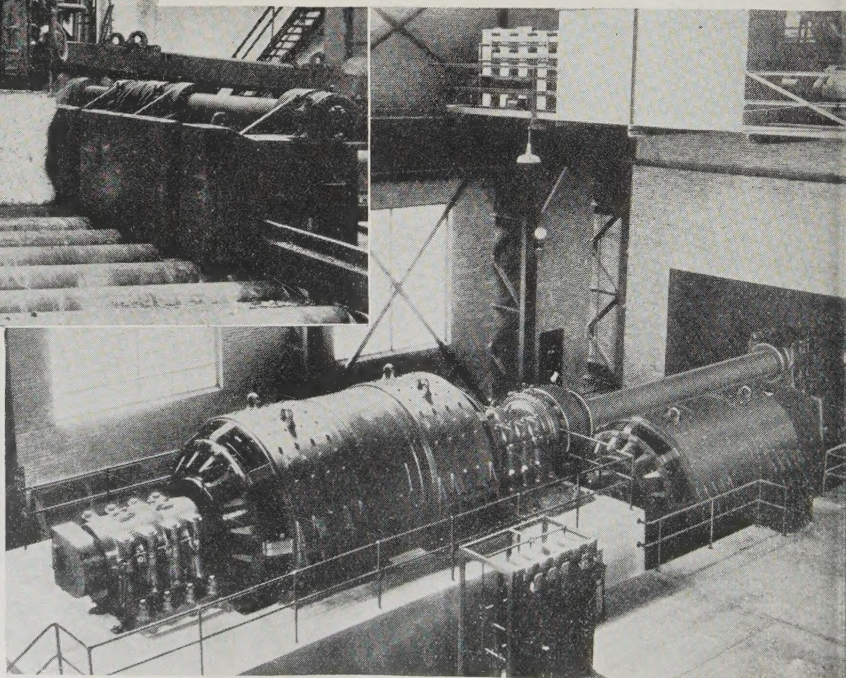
(right). A 10,000-horsepower twin motor drive for a large blooming mill
